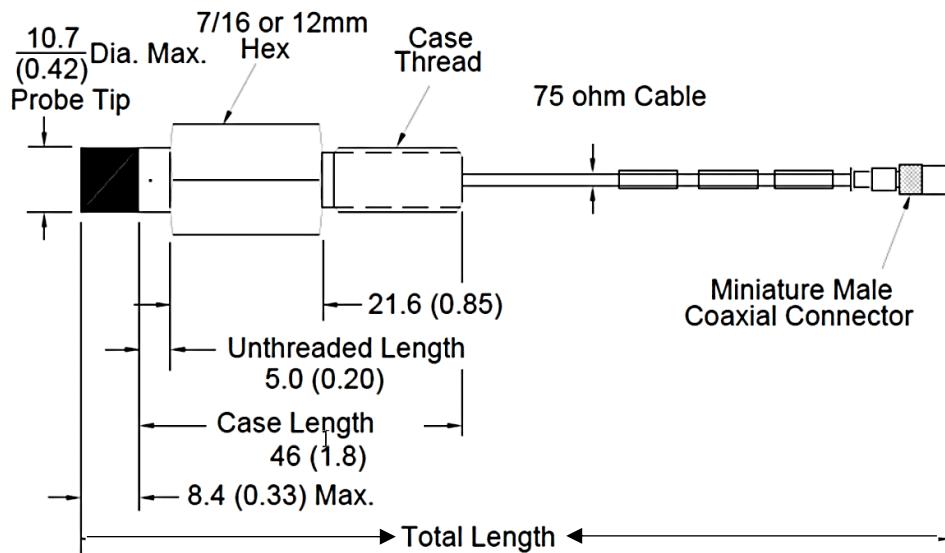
YB 3300XL 11mm Reverse Mount Probe
